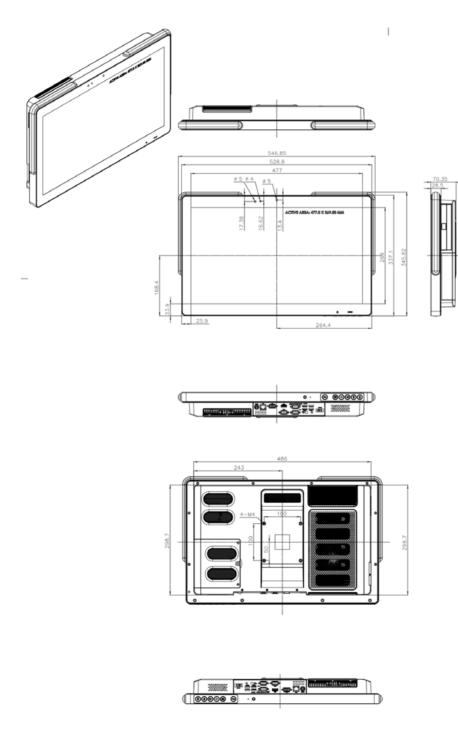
AFL2-W21A/AB-H61 Dimensions (mm)
